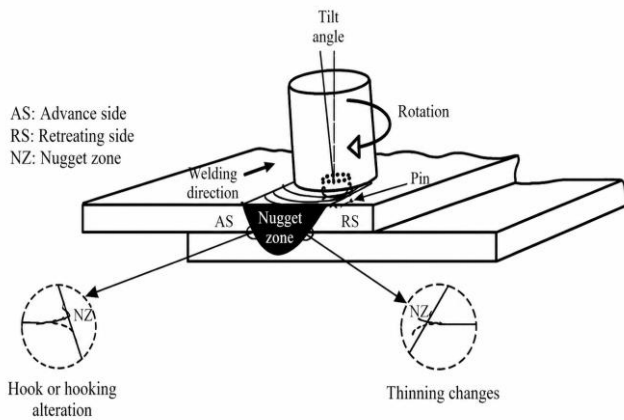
Schematic friction stir lap welding and hooks and plate thinning geometries [22]
